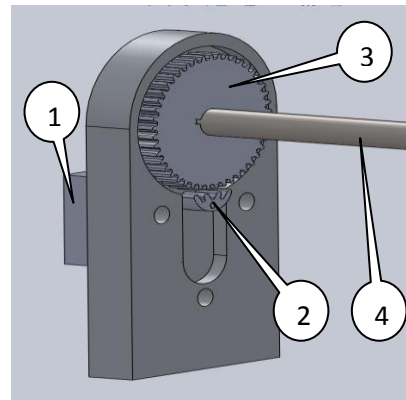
Ratchet/pawl locking mechanism located in robot thigh.
